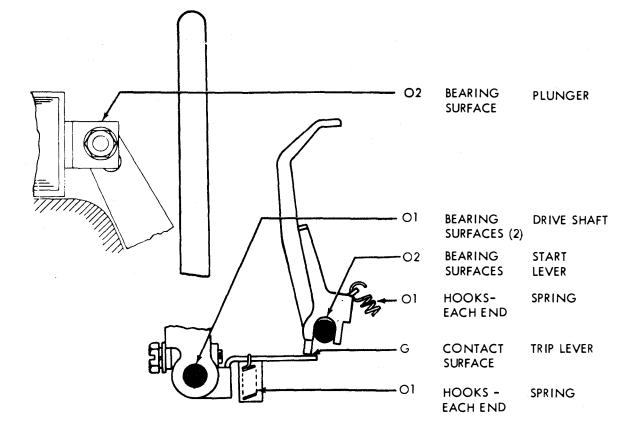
Manual and Solenoid Operated Interfering LTFS Tape Feed-Out Mechanism, Right Front View
